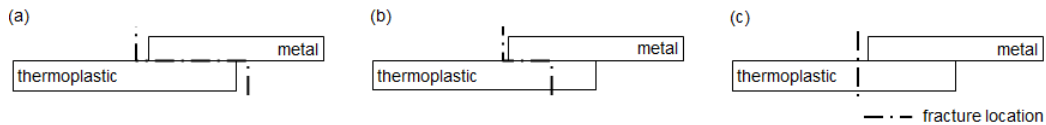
(a) Interface fracture; (b) mixed fracture; (c) base plastic fracture according to Wahba et al., 2011
